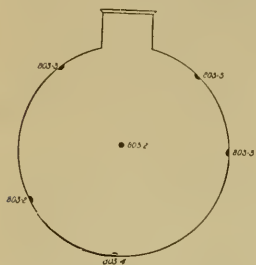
Gold 77'5 parts, silver 7'5 parts, zinc 15 parts; weight 3'530 kilograms.
